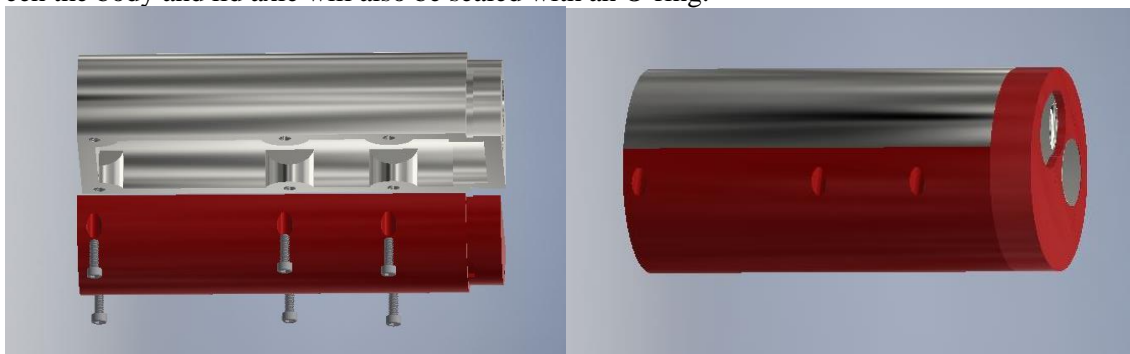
Thermal drill isometric view (left) and internal view (right)
